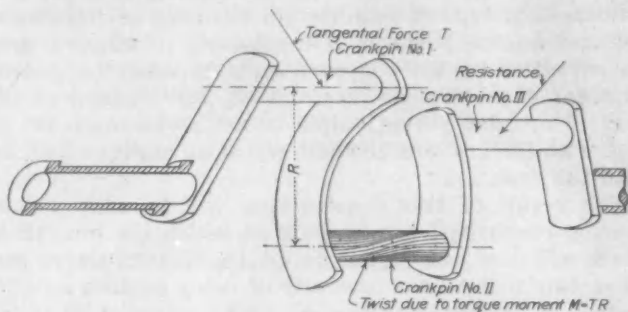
PART OF CRANKSHAFT ILLUSTRATING TORQUE IN CRANKPIN IN CASE OF THREE AND FOUR-BEARING SIX-THROW CRANKSHAFTS
